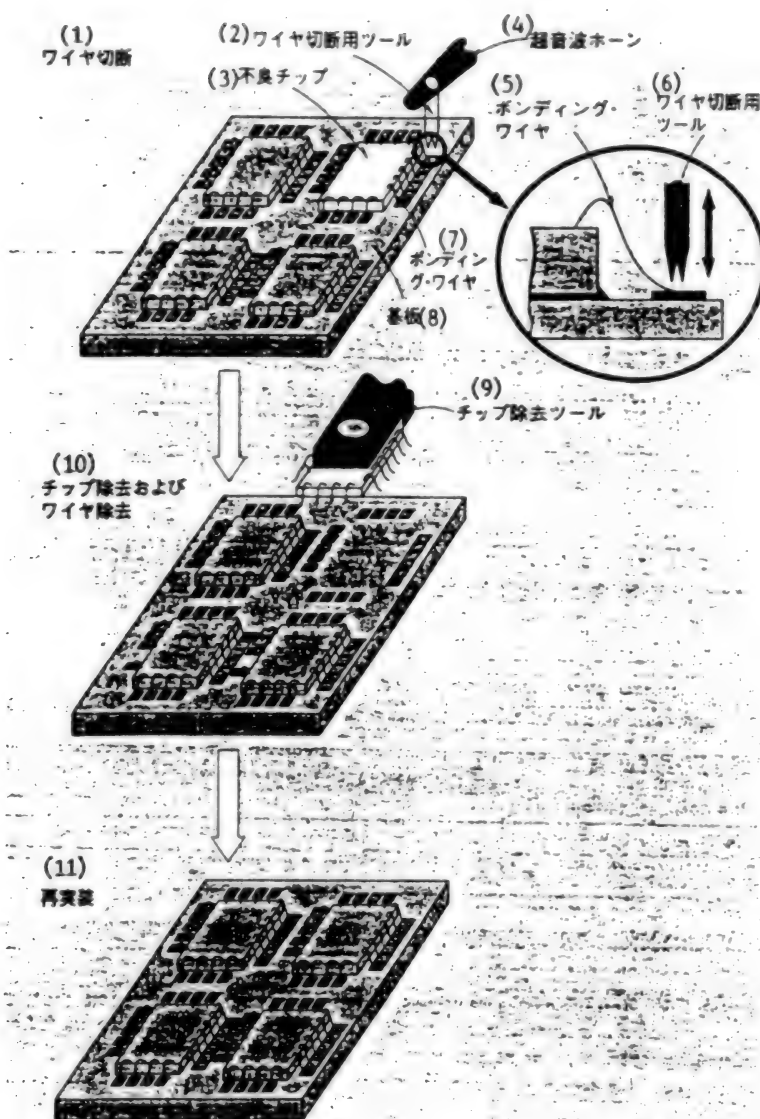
Repair Technique Developed for Use in Wire-Bonded Multichip Modules The bonding wires of defective LSI chips are cut where they connect to the board. Next, the LSI chip is removed together with the bonding wire. Then the good LSI chip is mounted. The tools used for cutting and removing can be attached to commercially sold wire bonding equipment.
